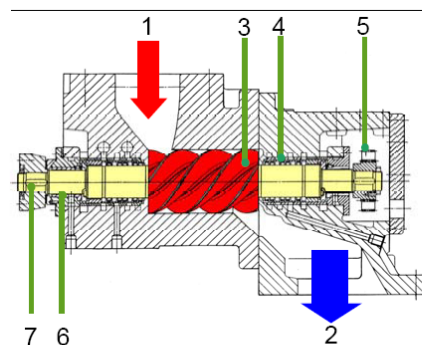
Section drawing of a screw-type engine (1...live steam inlet, 2...exhaust steam outlet, 3...male rotor, 4...shaft seal, 5...synchronisation gearwheels, 6...friction type bearing, 7...output shaft)
